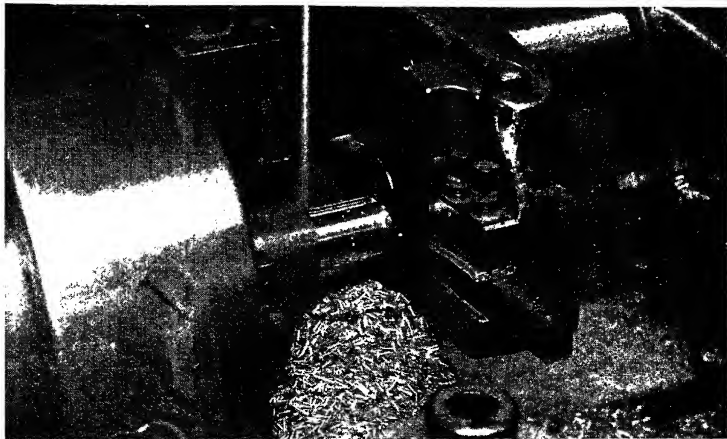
PRODUCTION OF SMALL TURNED COMPONENT ON A LIGHT CAPSTAN LATHE (2).
